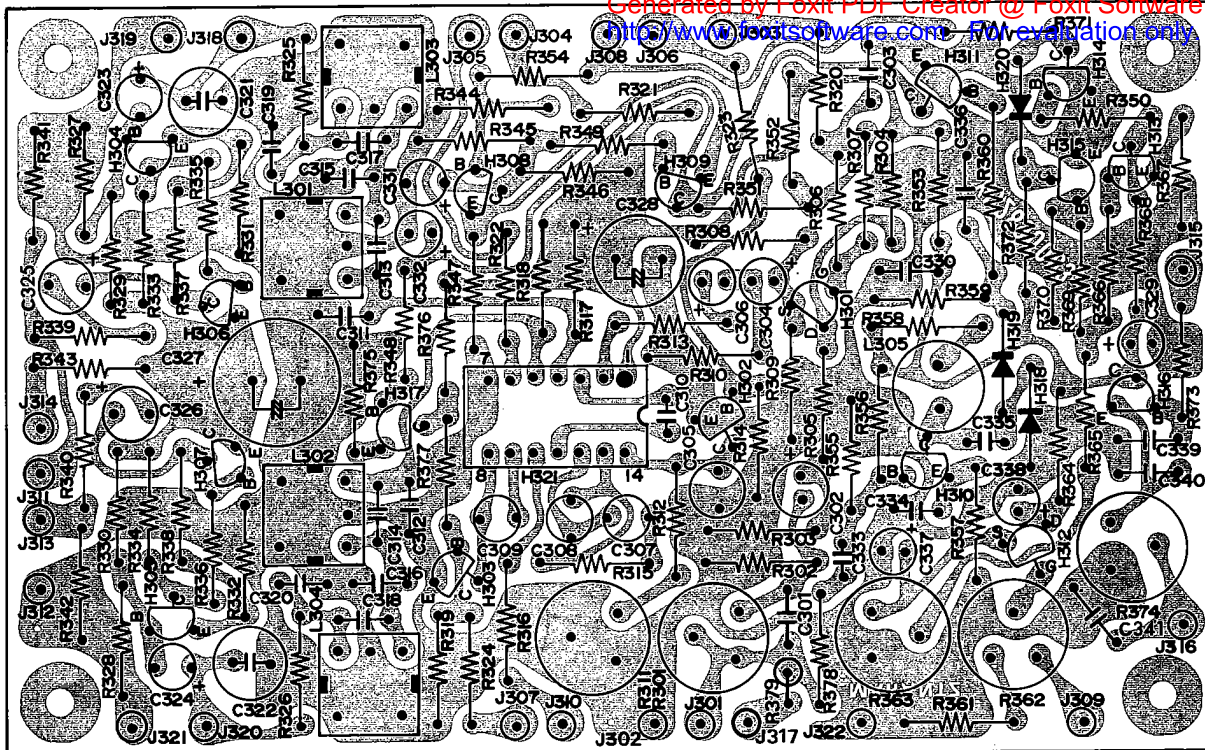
MPX Stereo Decoding Amplifier Assembly P300 Component Locations
